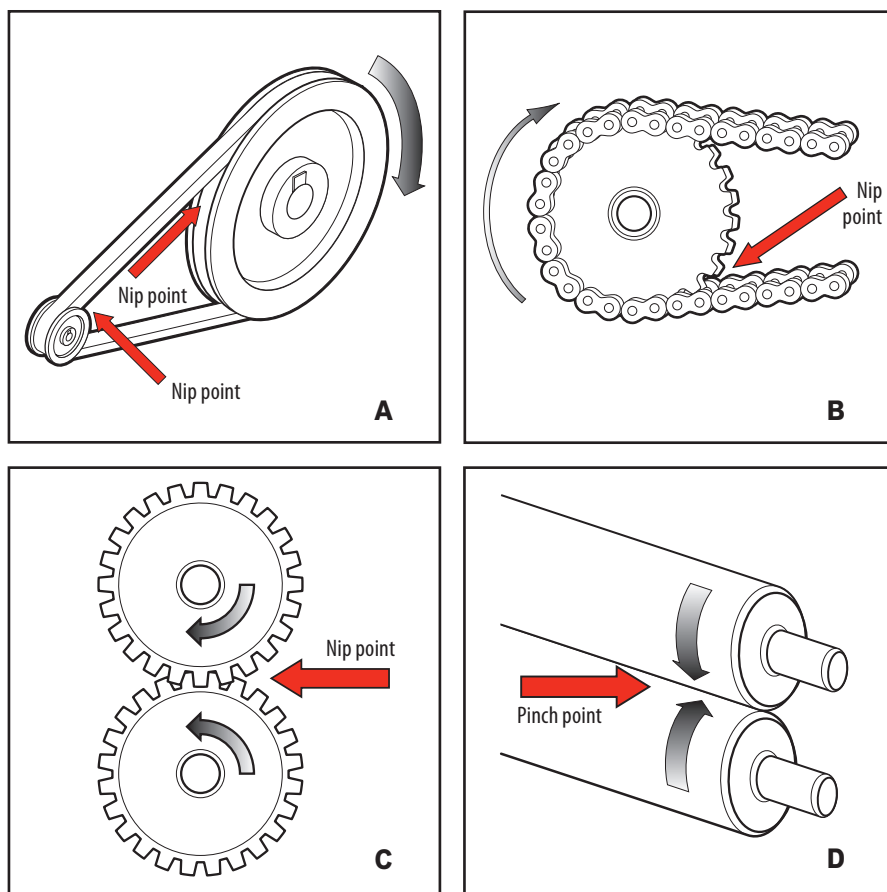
Multiple rotating parts presenting an in-running nip point hazard. (A) V-belt and pulley drive: a common source of in-running nip points on powered industrial machinery. (B) Typical chain-sprocket drive. (C) Typical exposed gears. (D) Typical feed rolls.
